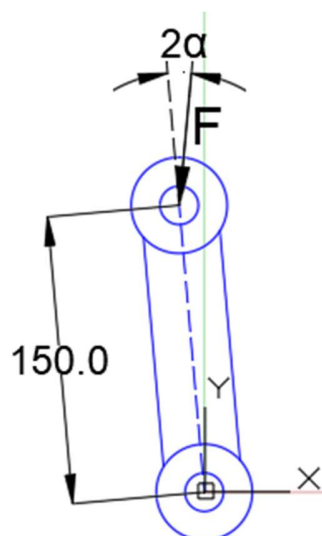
Drawing of the lower leg. Drawn with AutoCAD software
